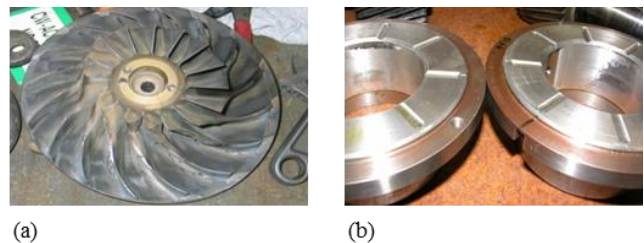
Failure of a large air compressor: (a) damaged centrifugal blade; (b) damaged thrust bearing.
